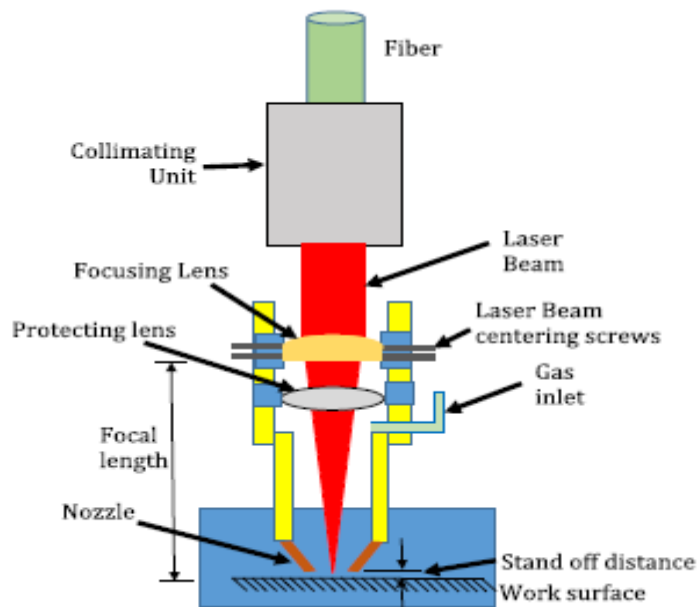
Schematics of laser head and workpiece arrangement in LBD (Hejjaji et al., 2016)
